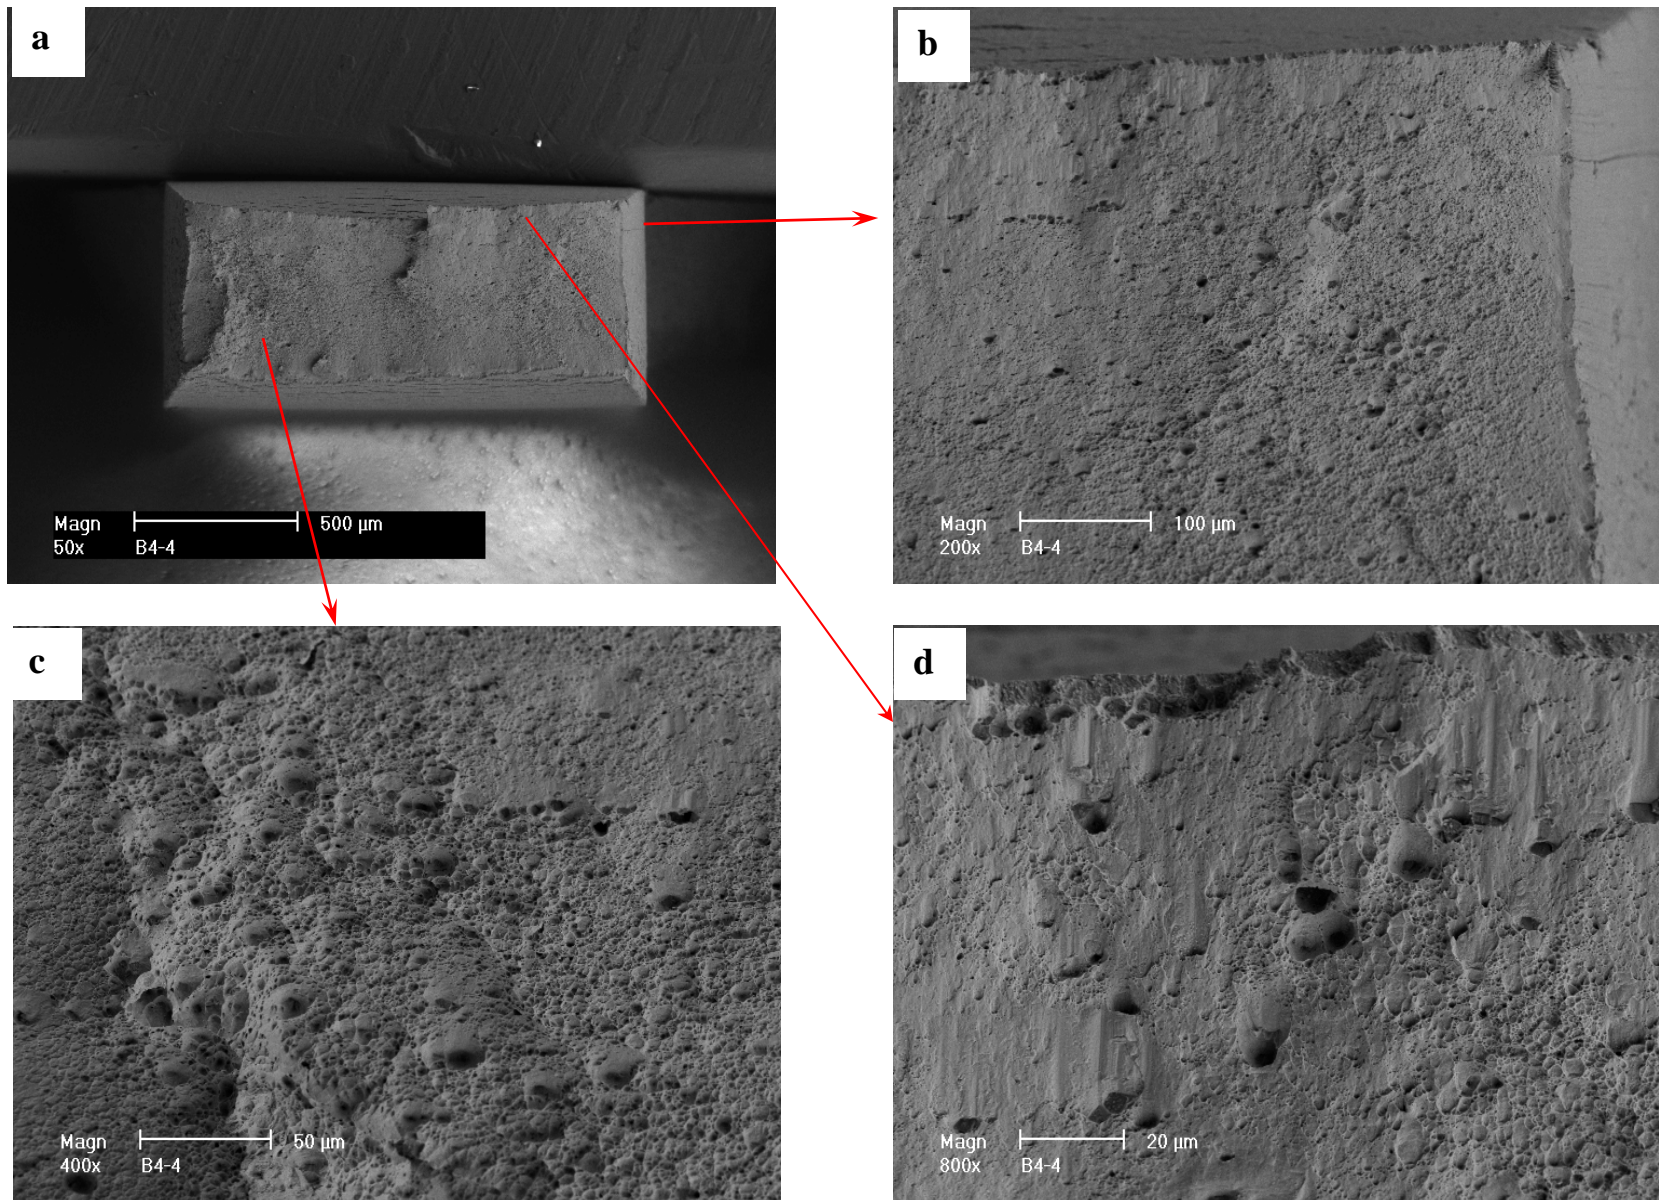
Fracture surface of SA Type 316LN-Ti SS irradiated to 47.5 dpa and tested in PWR water (specimen B4-4).
